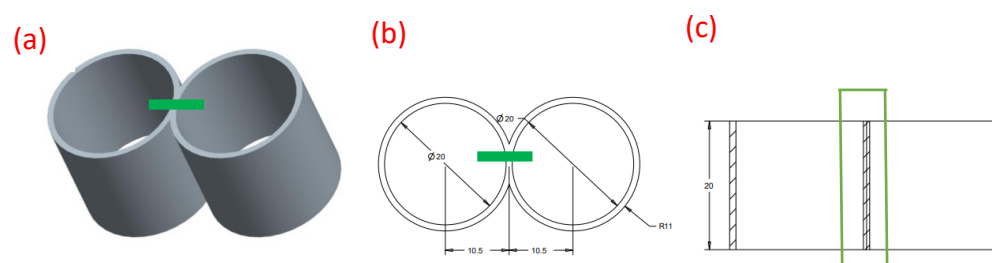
(a) Sectioning of test structure B-model, (b) engineering drawing top view, (c) side view with cross-area.
